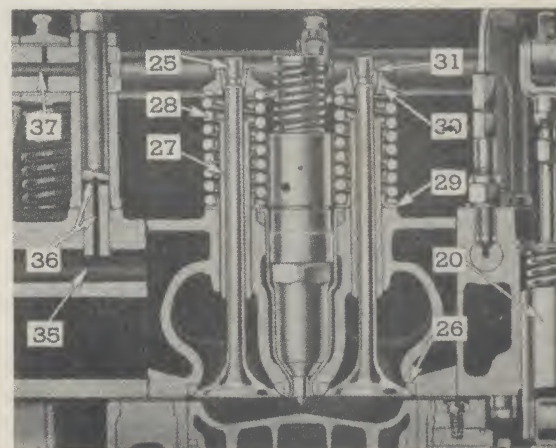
A — A GM engine showing installation of exhaust valves, injector, and cam follower and push rod assembly.
